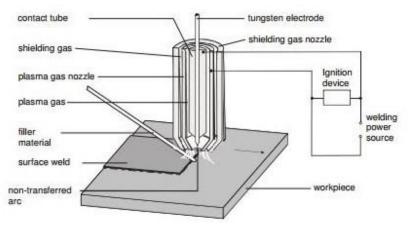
Plasma Arc Welding with non- transferred Arc
